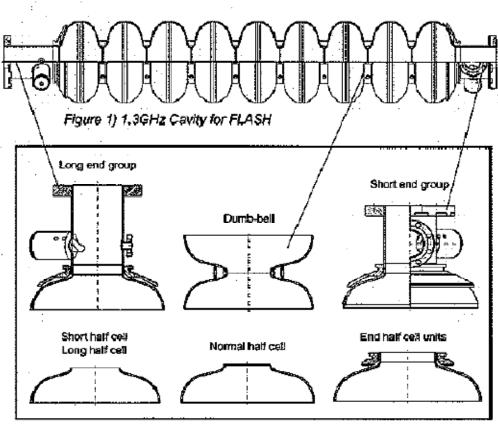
Measurable parts and subassemblies of the 1.3GHz cavity
